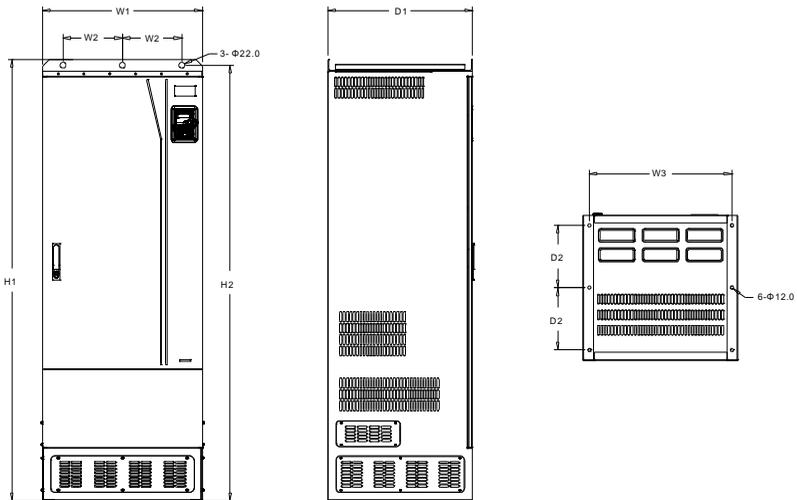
Floor installation diagram of inverters of 400 V, 355 to 400 kW
